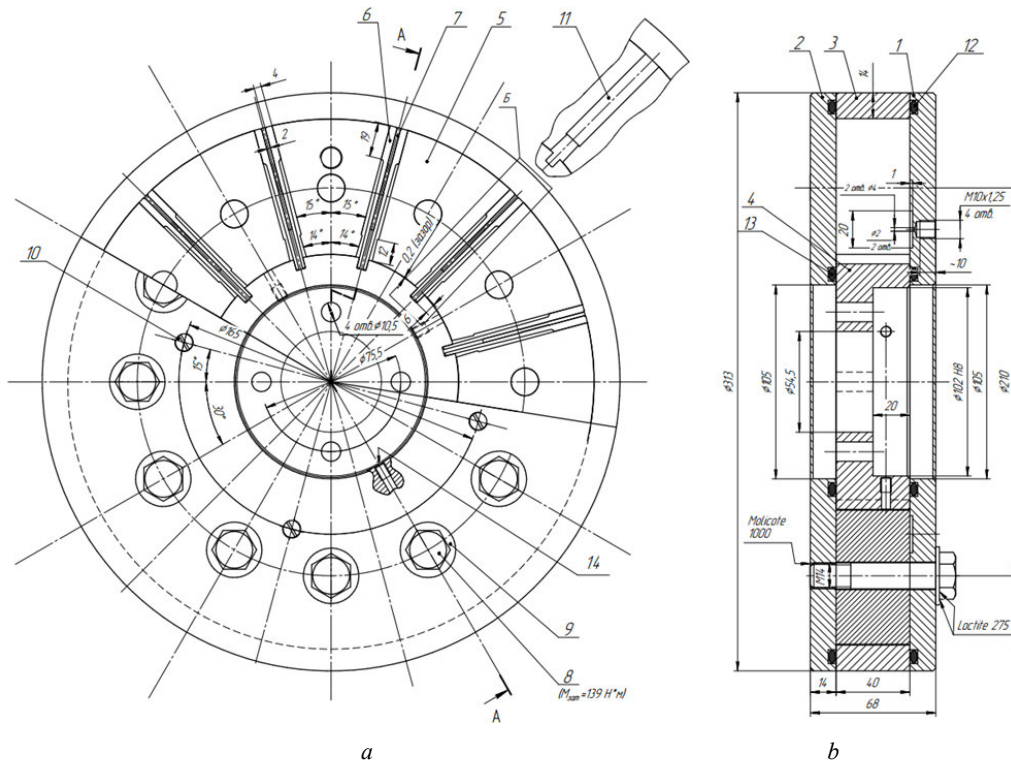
Drawing of the general view of the model spring damper of torsional vibrations: *a* – front view; *b* – side view; 1 – side plate; 2 – flange; 3 – coupling ring; 4 – sprocket housing; 5 – intermediate block; 6 – plate spring; 7 – interplate spring; 8 – bolt M14 × 1.25; 9 – disc washer; 10 – bolt M10 × 1.25; 11 – insert; 12, 13 – sealing ring, 14 – lubrication oil supply
